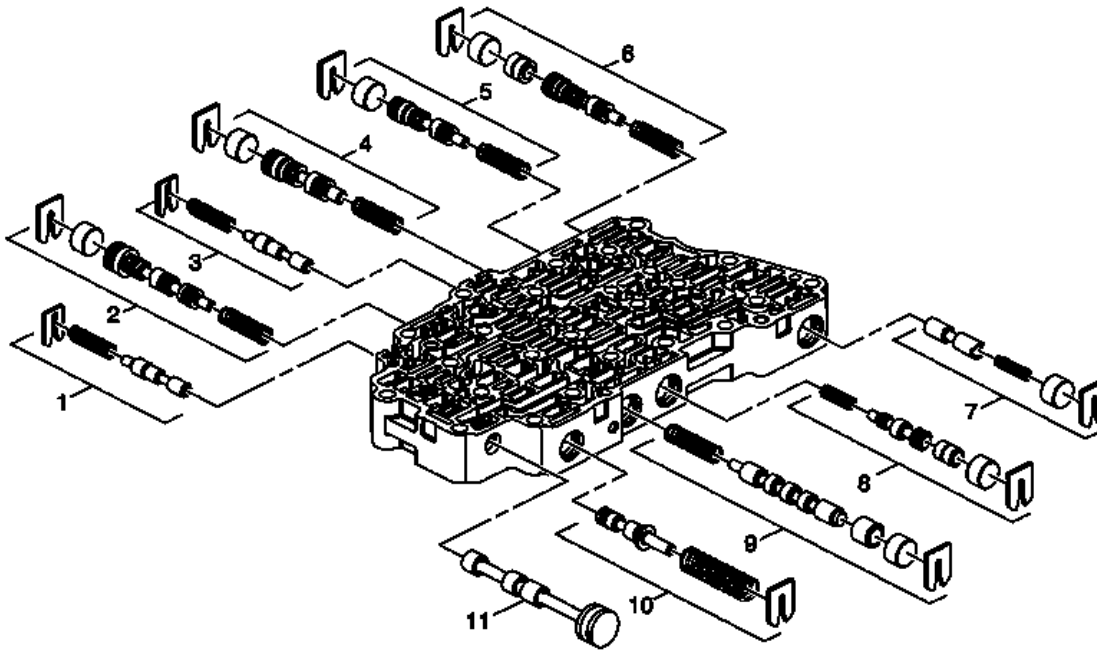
Control Valve Body Cleaning and Inspection (Gen 2)
